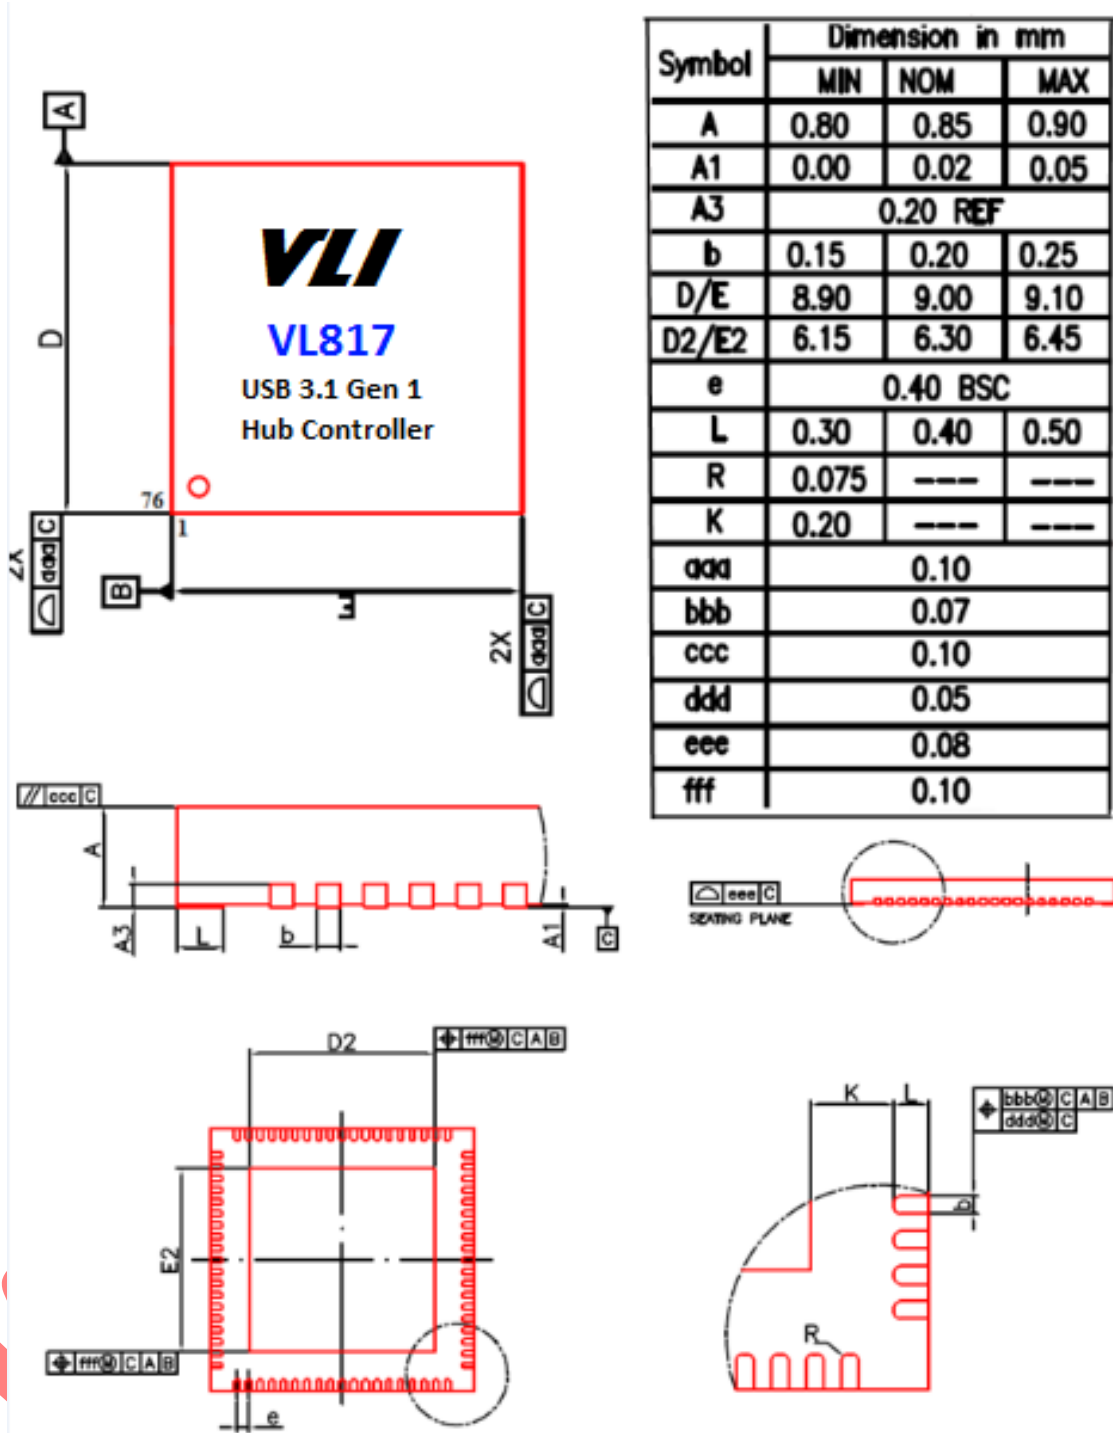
Mechanical Specification – QFN 76L 9x9x0.85 mm Package
